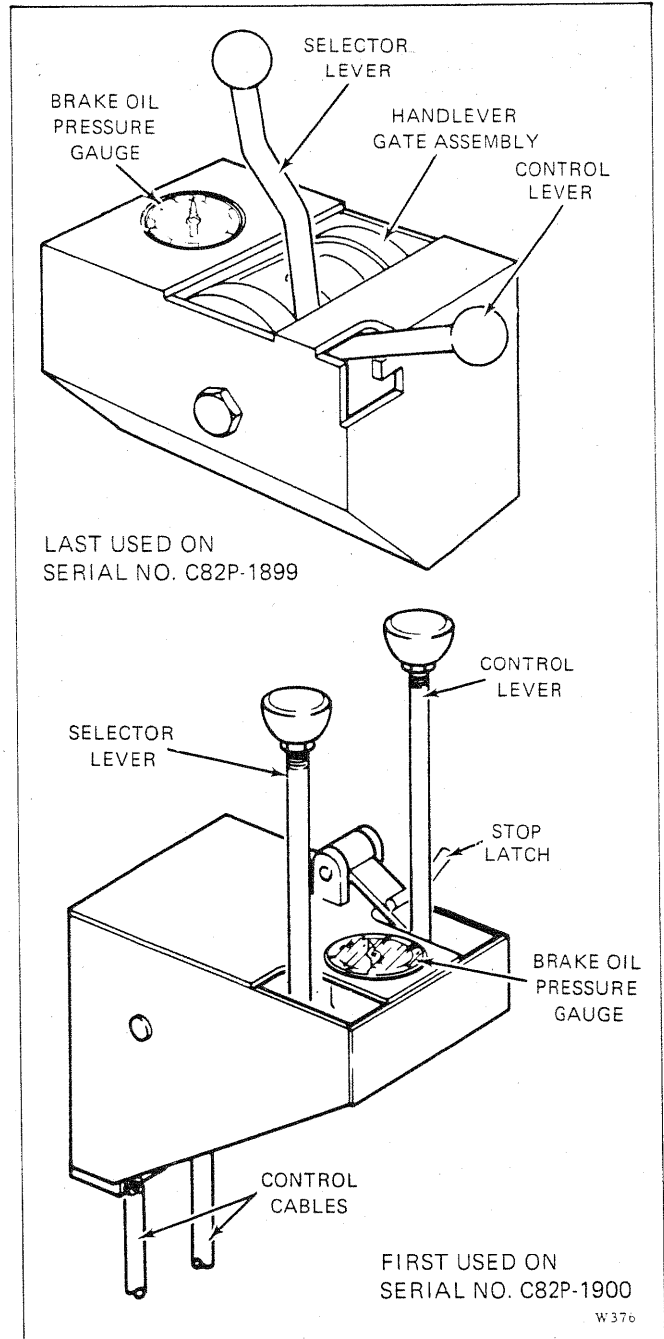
HANDLING GEAR FOR POWER CONTROLLED WINCH
